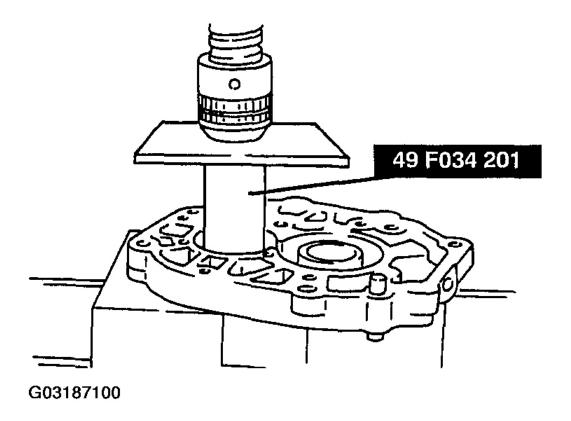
Installing Countershaft Center Bearing Courtesy of MAZDA MOTORS CORP.
